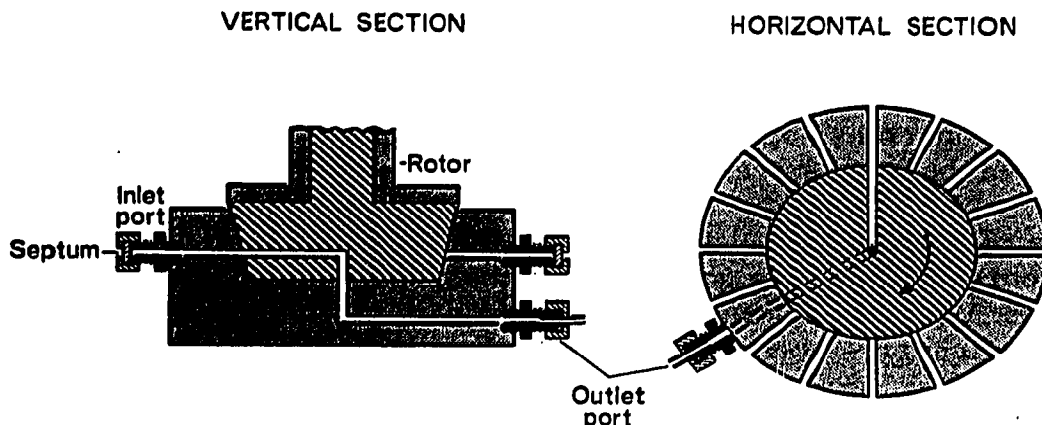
Rotary valve of automatic gas-injection apparatus. The tapered end of the rotor is made of PTFE, and is fixed to a brass shaft; the body of the valve is brass. The sixteen inlet ports (not shown in the horizontal section) are made from Simplifix stainless steel couplings for 1.6 mm O.D. tubing, and fitted with latex rubber septa 1 mm thick.
